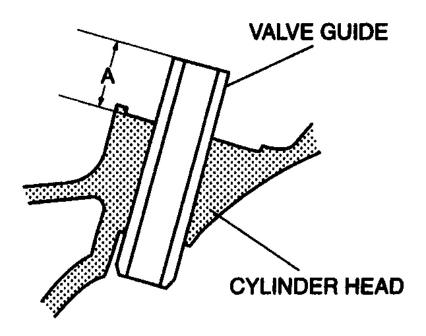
Installing Valve Guide Courtesy of MAZDA MOTORS CORP.
